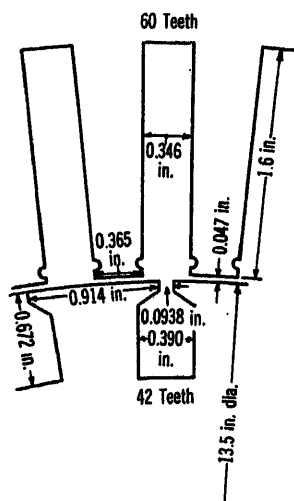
SPECIAL INDUCTION MOTOR SHOWING TOOTH SLOTS
